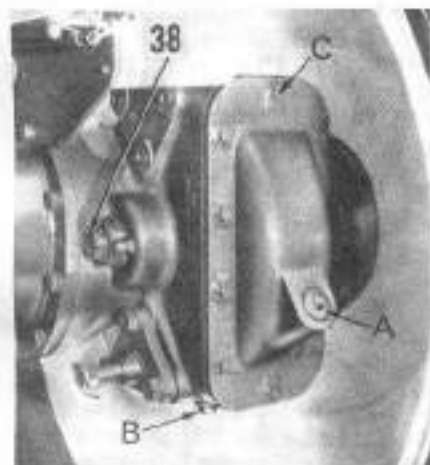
View showing location of axle bearing adjusting screw (38) at inner side of final drive housing on some models.
